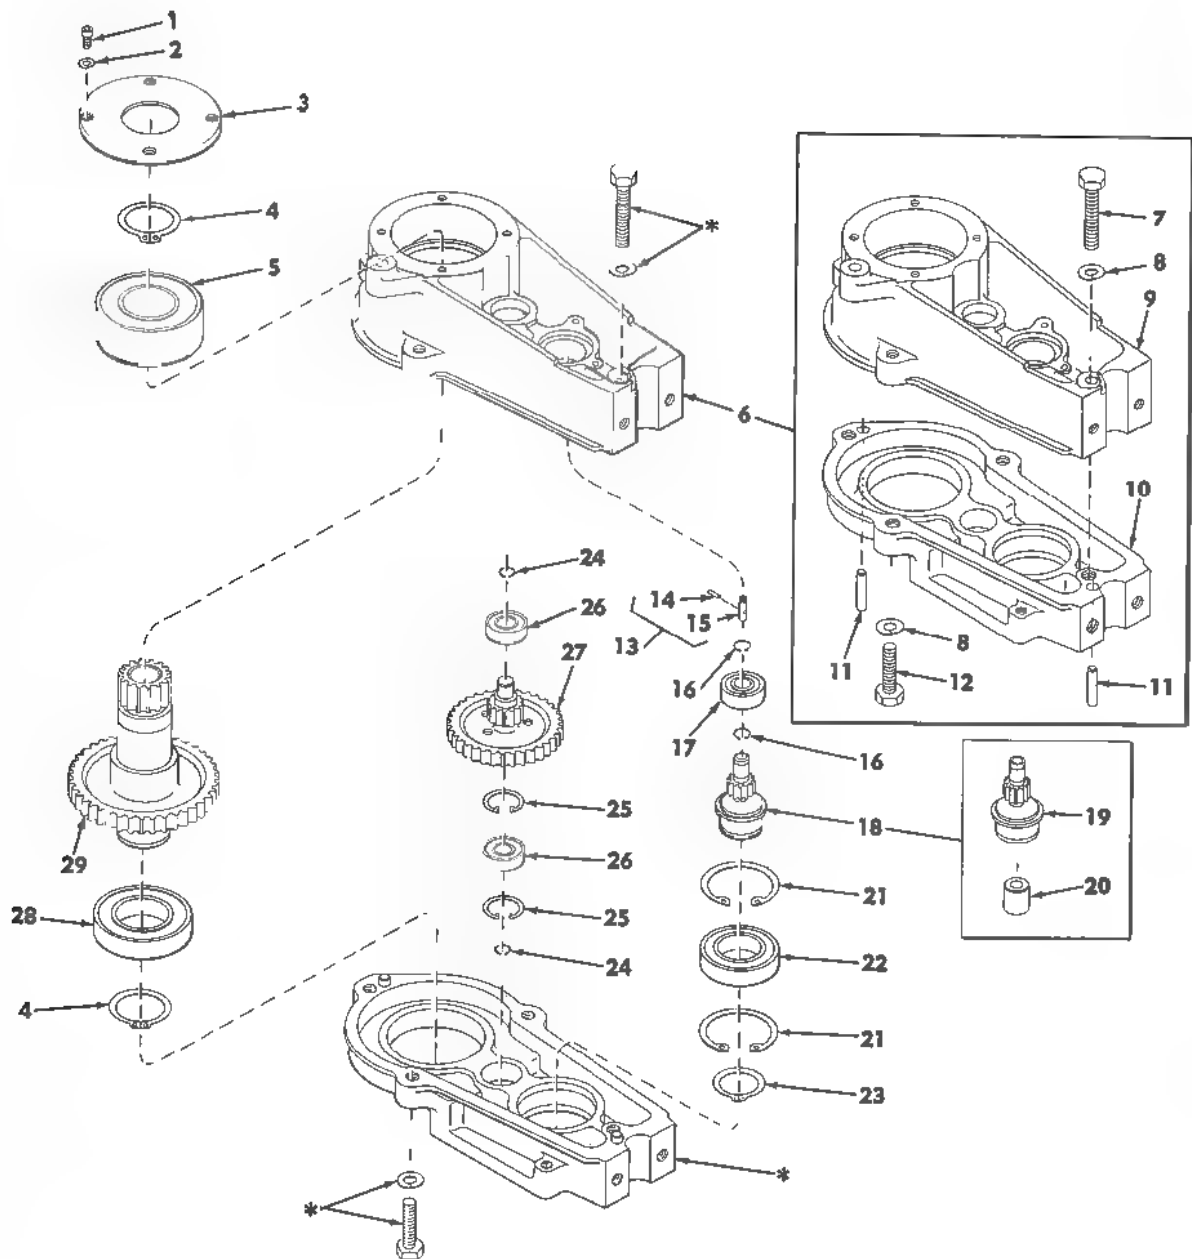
BLOWER, VANEAXIAL /8000921/-EXPLODED VIEW
